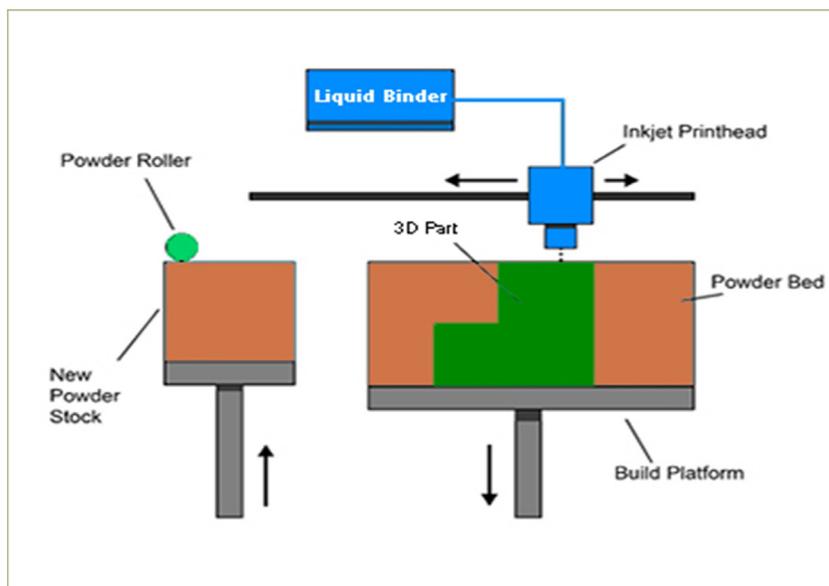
A typical operational setup carried out in Binder Jetting Process [13].
